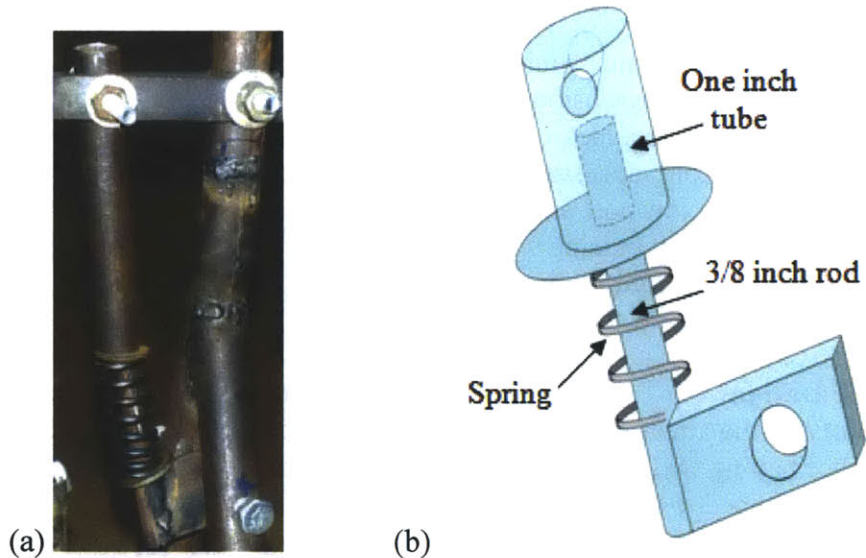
Alpha-prototype Spring Mount. (a) This is a photograph of part of the alpha-prototype's suspension system. The bar on the right hand side connects to the front wheel axle below the picture's frame. The top link connects to the handlebar bar just off the left edge of the frame. (b) This sketch shows how the spring is mounted into the system. The rod is allowed to move freely within the piece of one inch tubing. When the rod is forced up into the tube by the movement of the suspension system, the spring is compressed.
